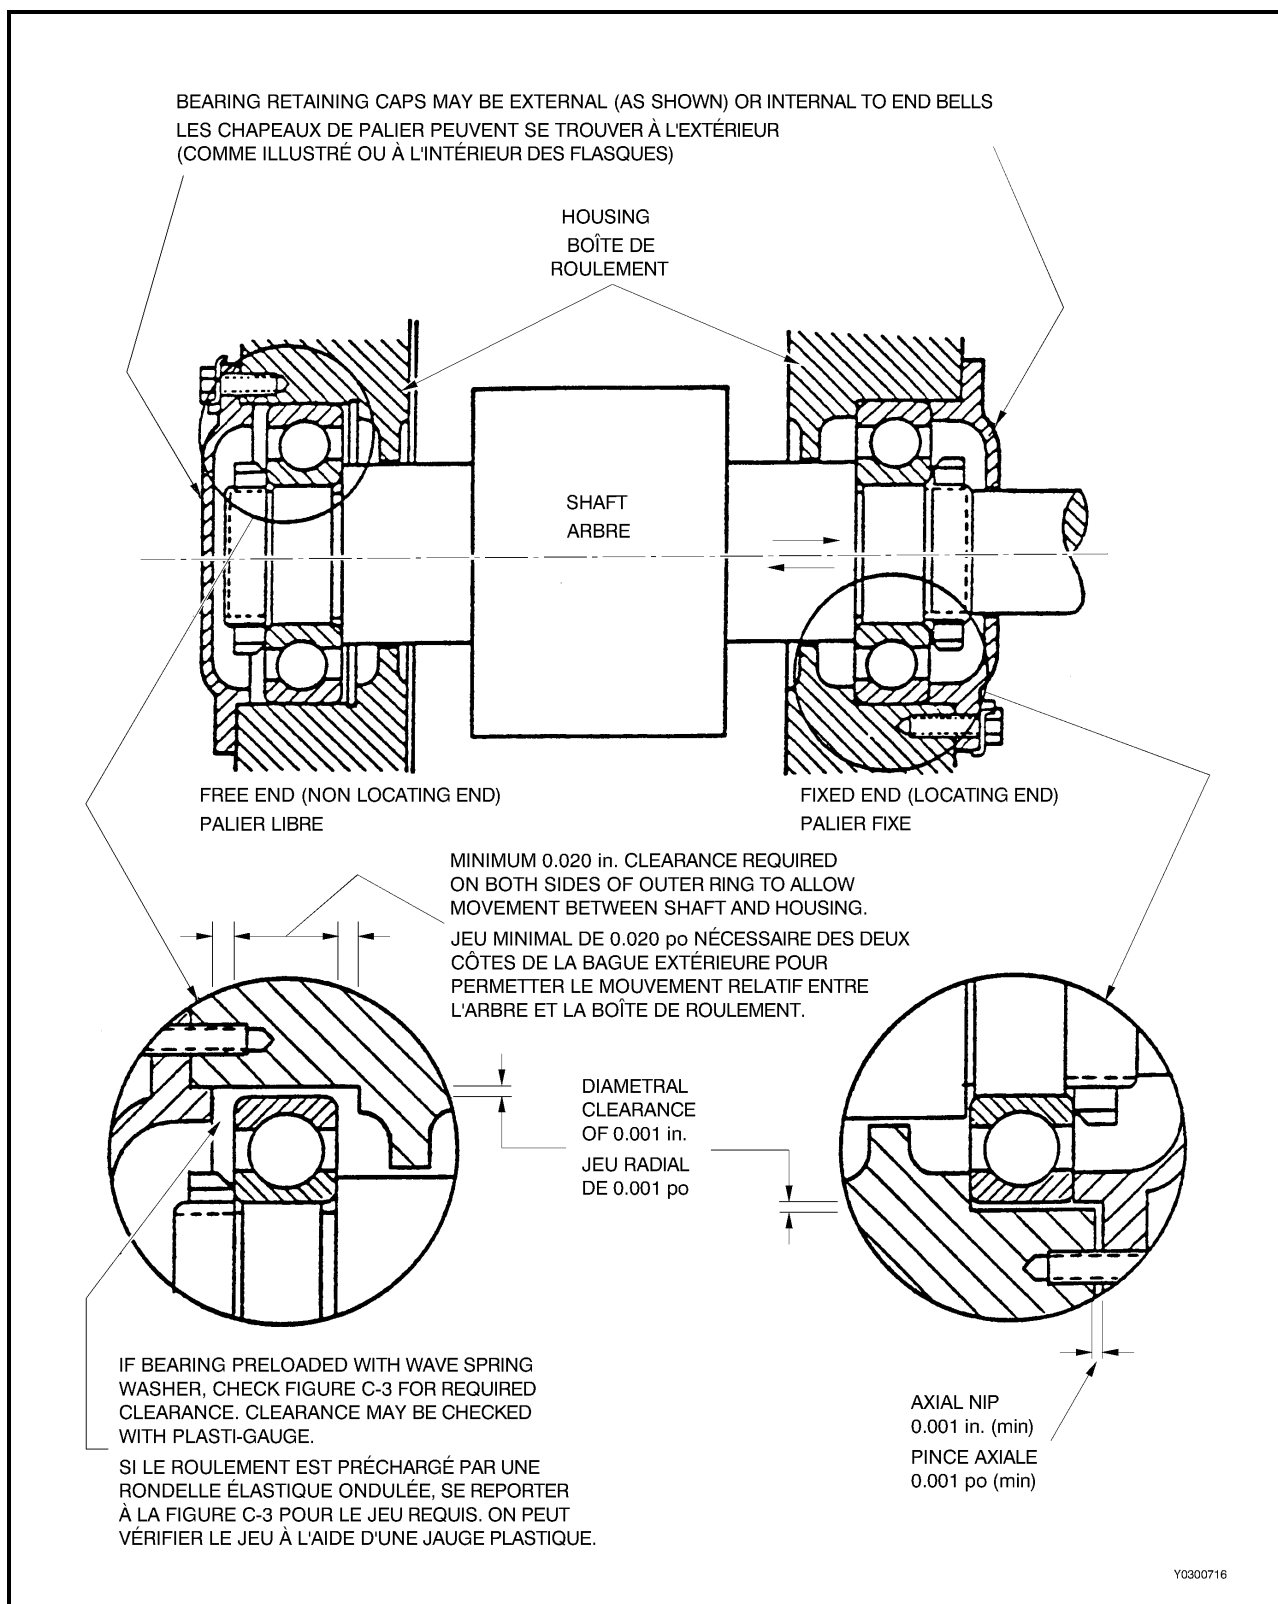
Fixed-Free Bearing Mounting Method with Ball Bearings
